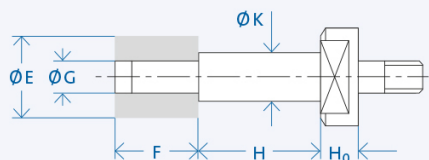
WITH ADJUSTMENT SCREW (PS)
